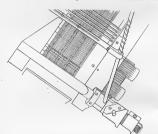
Typograph; assembly-channel filled with single-letter matrices and vice-jaw closed ready for line-justification.
